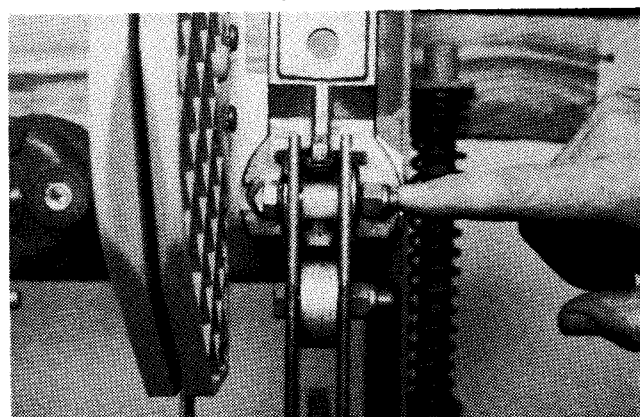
Proper Alignment of Main Blades and Jaw Casting
